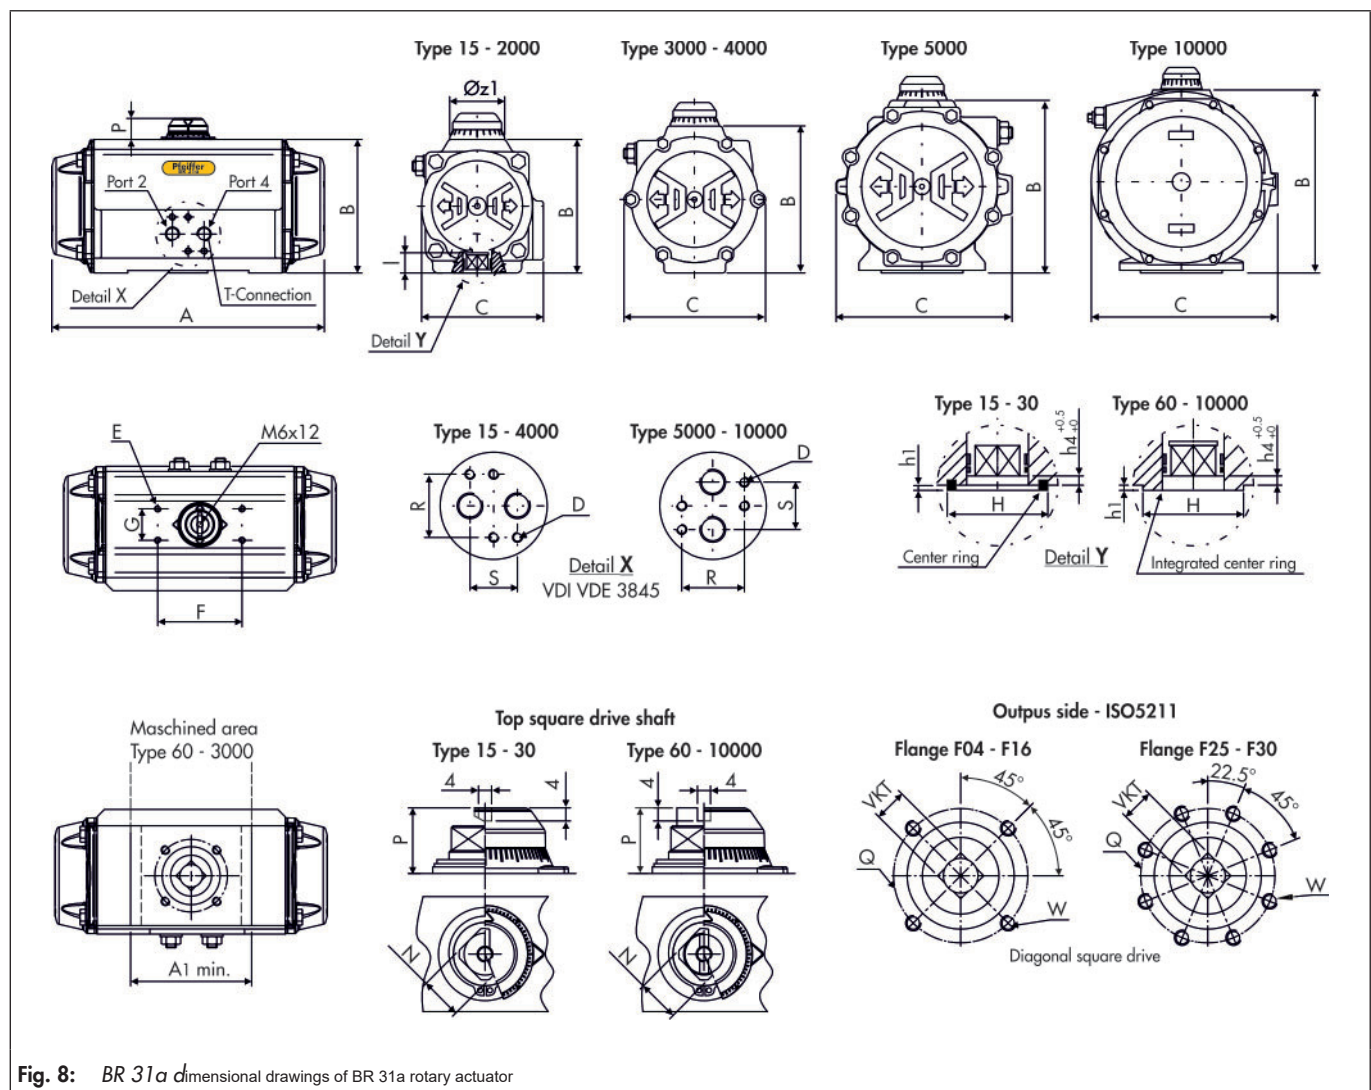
BR 31a dimensional drawings of BR 31a rotary actuator
